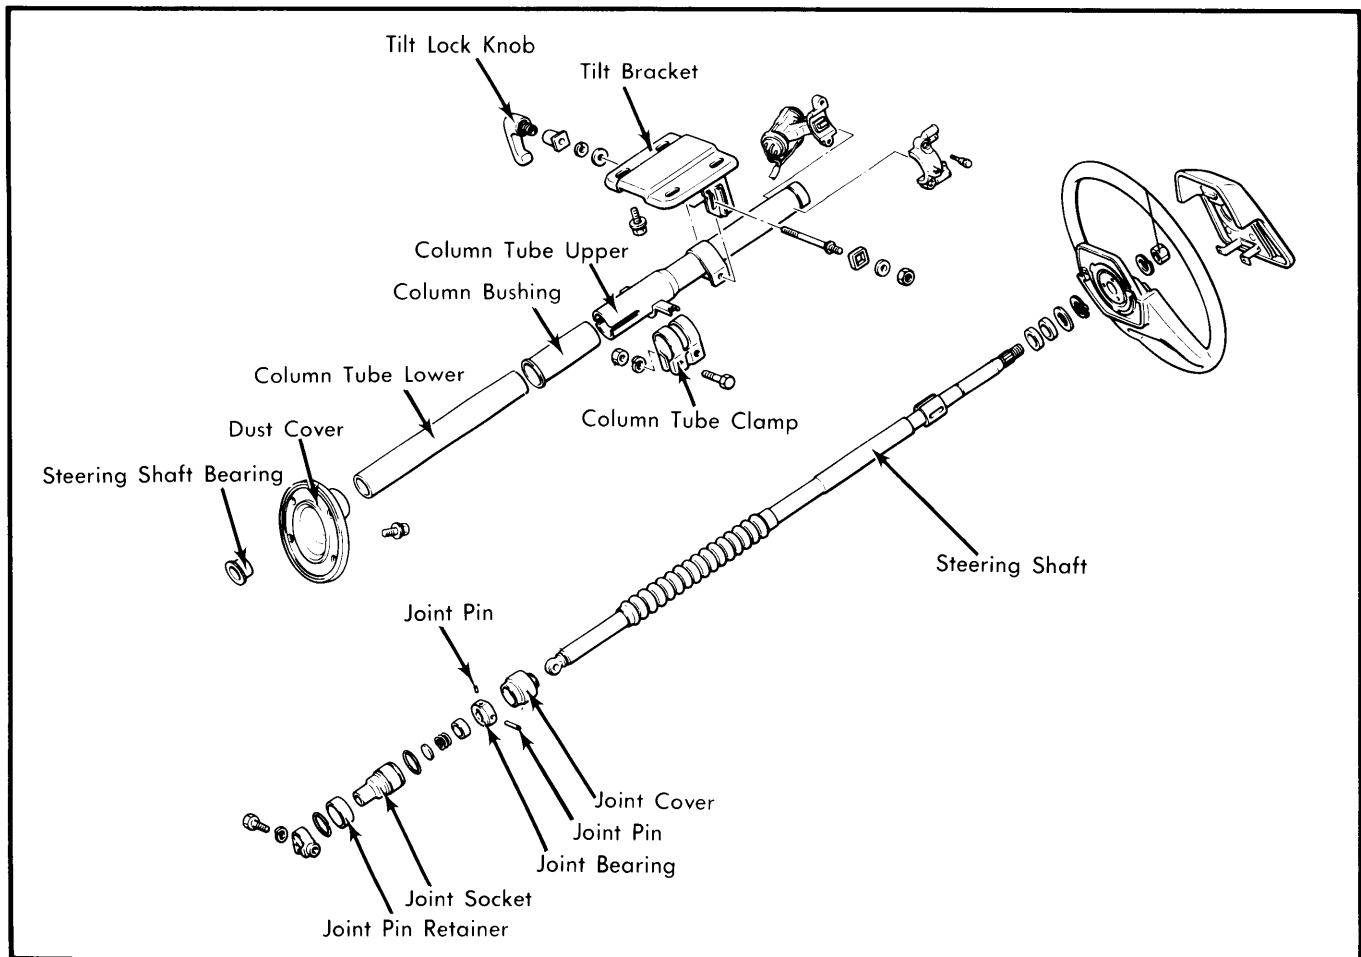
Exploded View of Steering Column Components (Challenger & Sapporo)
